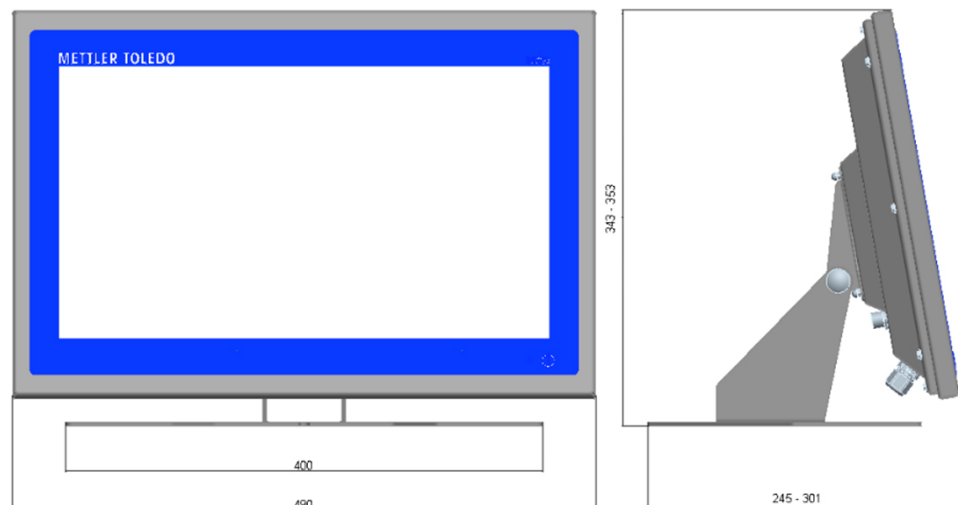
Dimensions of IND970-19, Desk/Panel Version
